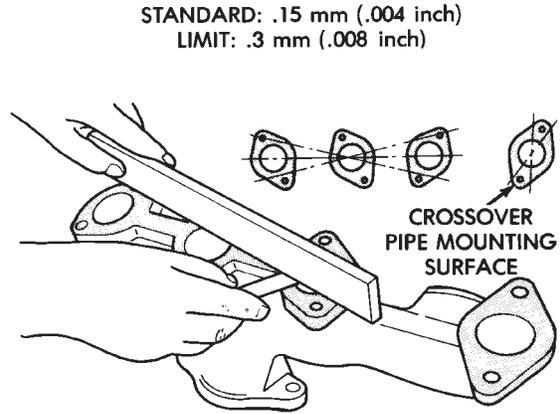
Check Exhaust Manifold Mounting Surface and exhaust crossover mounting surface with a straightedge and thickness gauge (Fig. 20).
